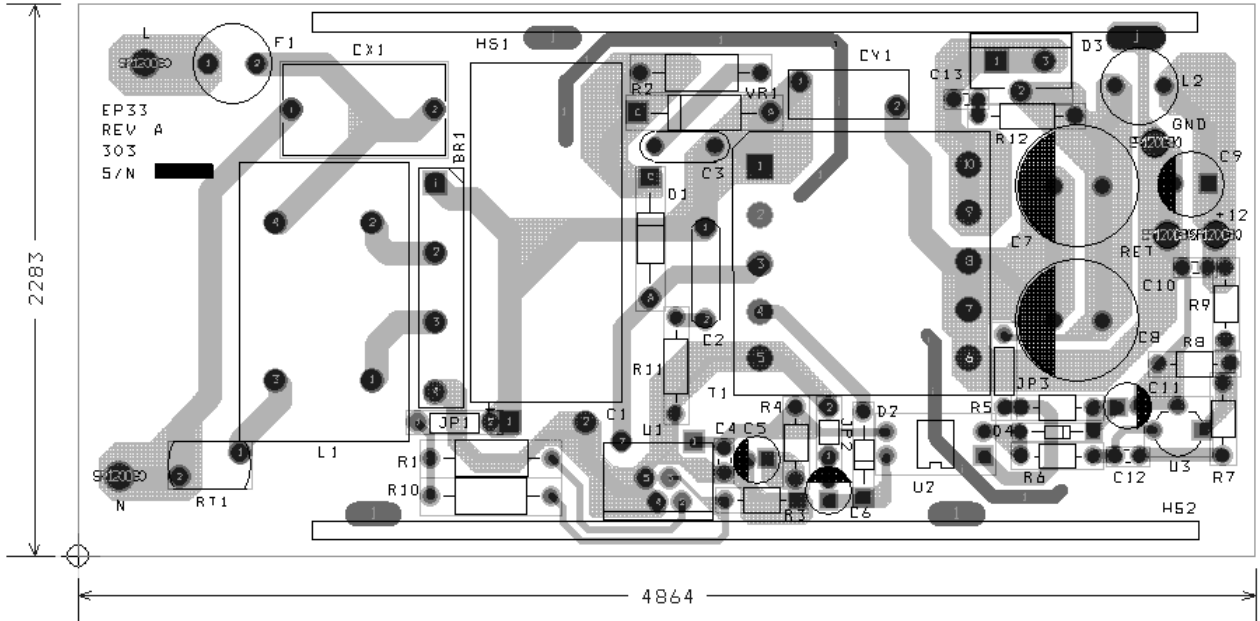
EP-33 Printed Circuit Board Layout (dimensions 0.001”).
